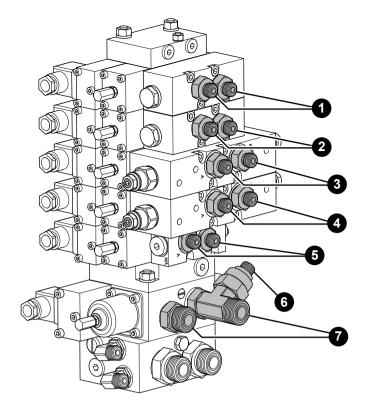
Valve Block Arm System (Boom-stick hydraulic system)
